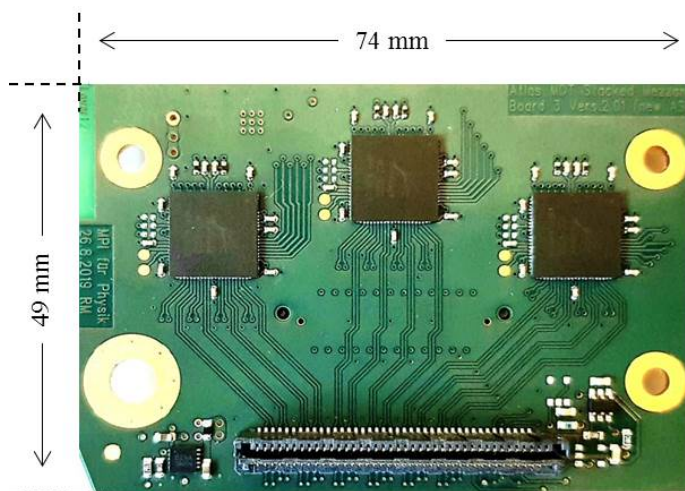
3 ASD2 mounted on a PCB for the SMDT readout.
